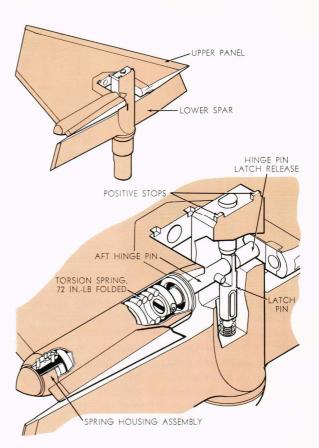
Cutaway drawing of the self-erecting missile fin shown partially folded.
